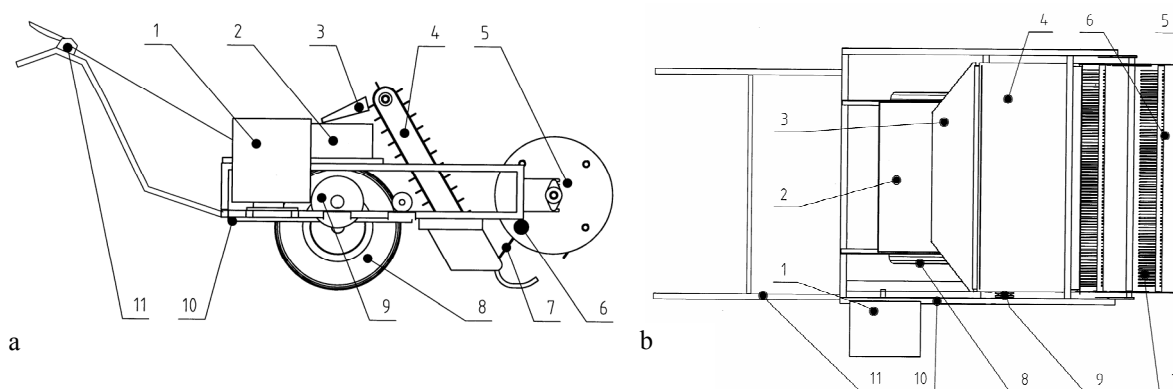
The blueberry harvester assembly and parts: a – front; b – top; 1 – engine; 2 – berry box; 3 – chute; 4 – conveyor; 5 – picking reel; 6 – picking rake; 7 – rake teeth; 8 – wheels; 9 – power transmission elements; 10 – frame; 11 – levers with steering mechanics
